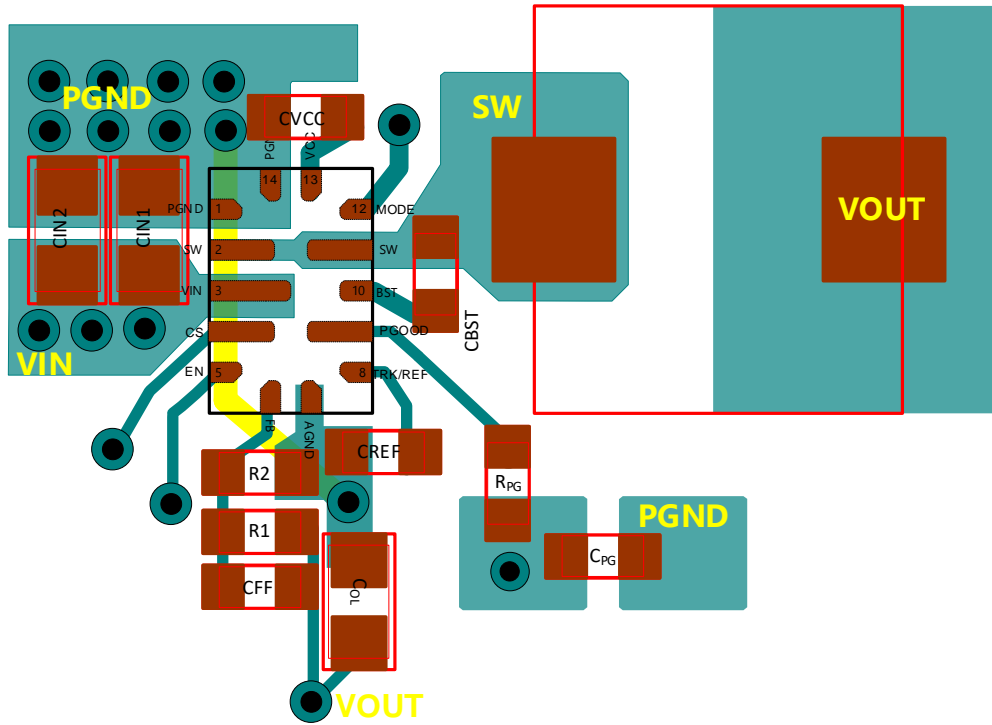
Example of PCB Layout (Placement & Top Layer PCB)
